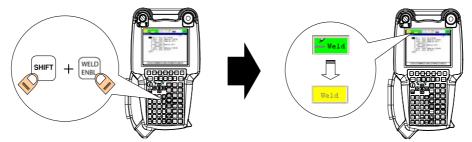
(f) Switch to Weld Disabled
